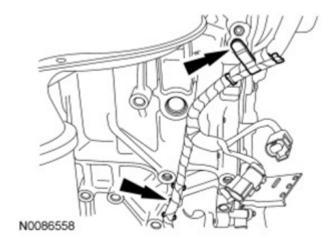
Locating Engine Wiring Harness Pin-Type Retainers Courtesy of FORD MOTOR CO.
